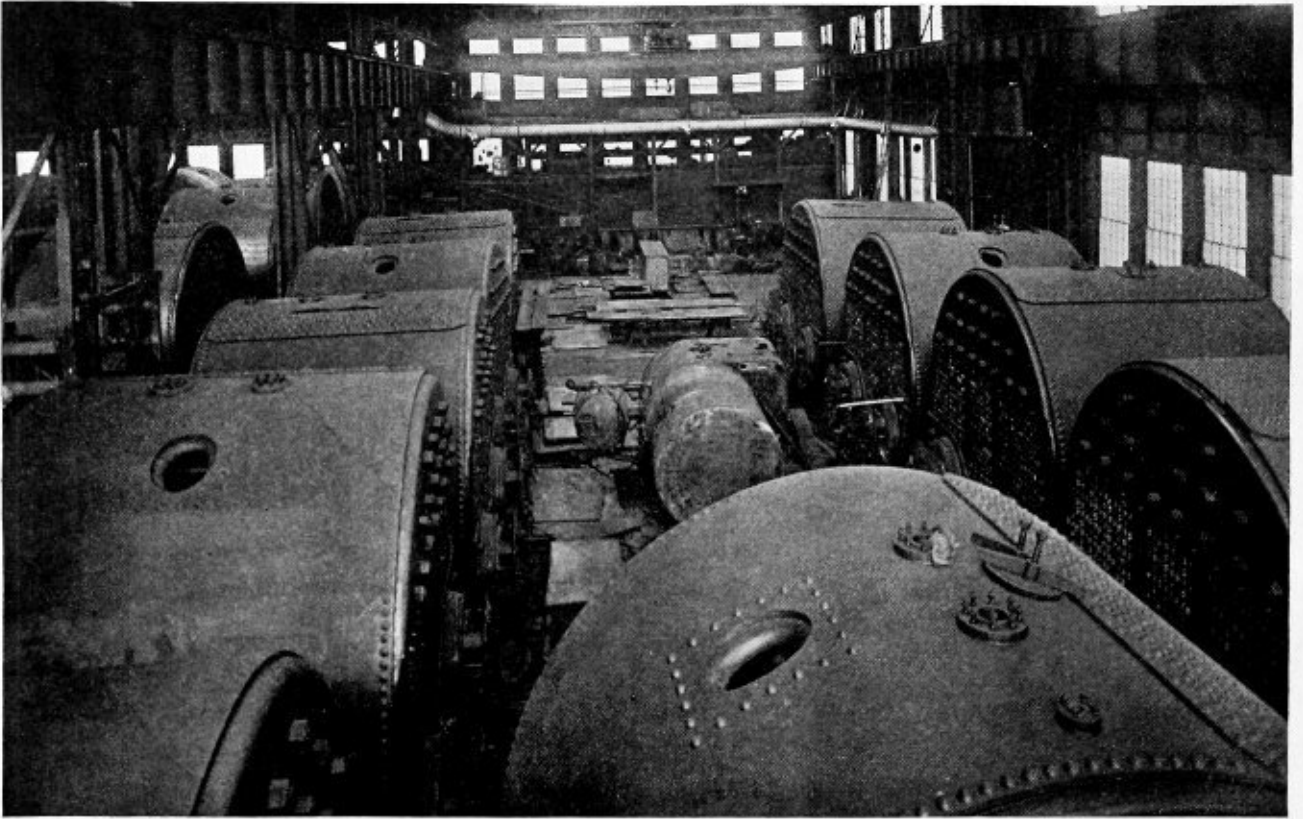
Erection Floor of Manitowoc Boiler Shop
